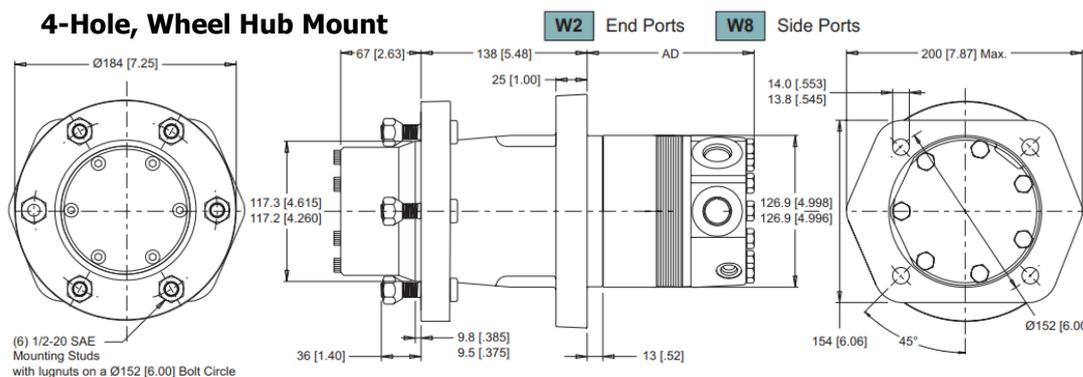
DT 740 4-hole (Wheel Hub Mount)
